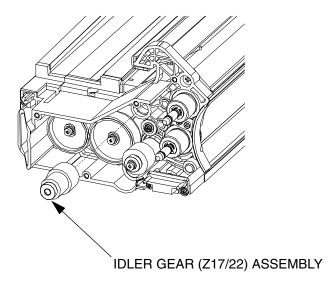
Removal of the Idler Gear (Z17/22) Assembly
